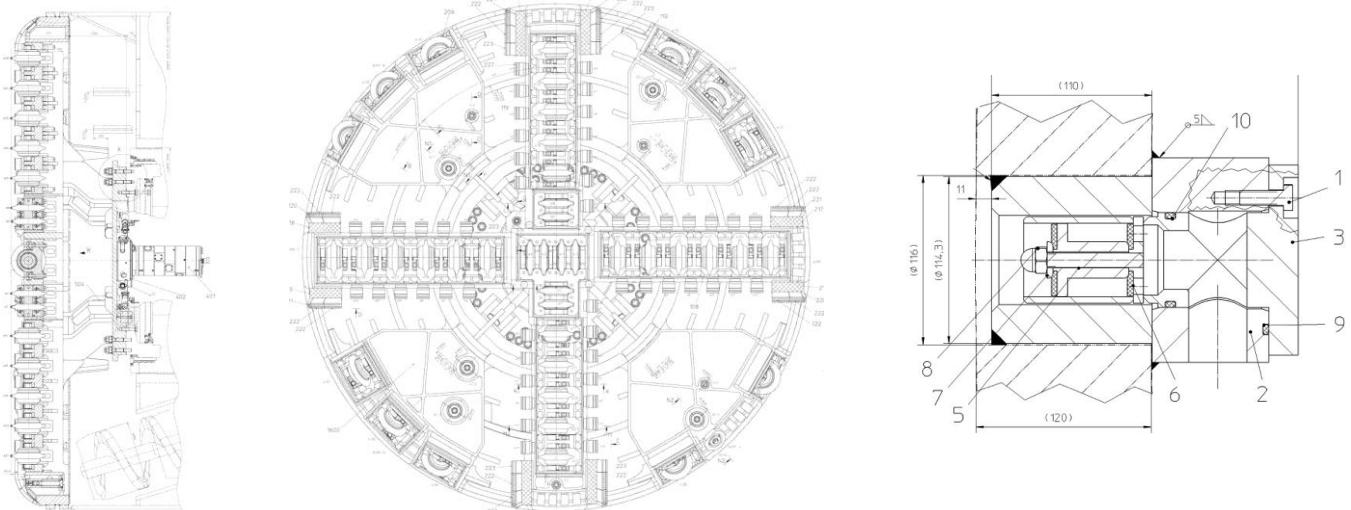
Cutterhead design (side and front view), foam nozzle detail
